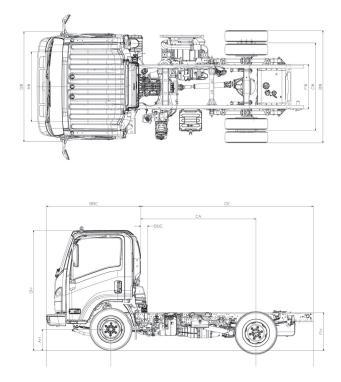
N-Series Diesel Cab Chassis Dimensions
